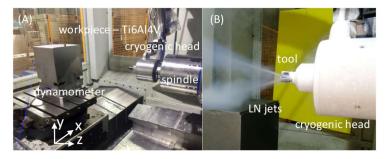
Experimental set-up (Kistler dynamometer) and details of the cryogenic milling set-up (A), LN jets (B)
